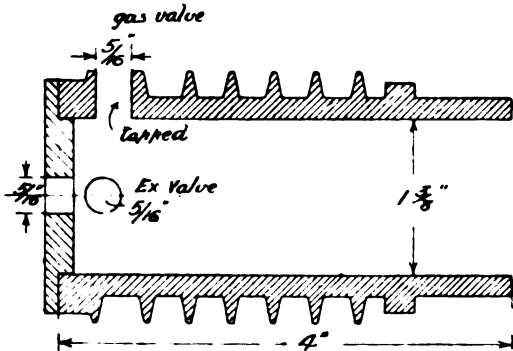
SECTION THROUGH GAS ENGINE CYLINDER.
